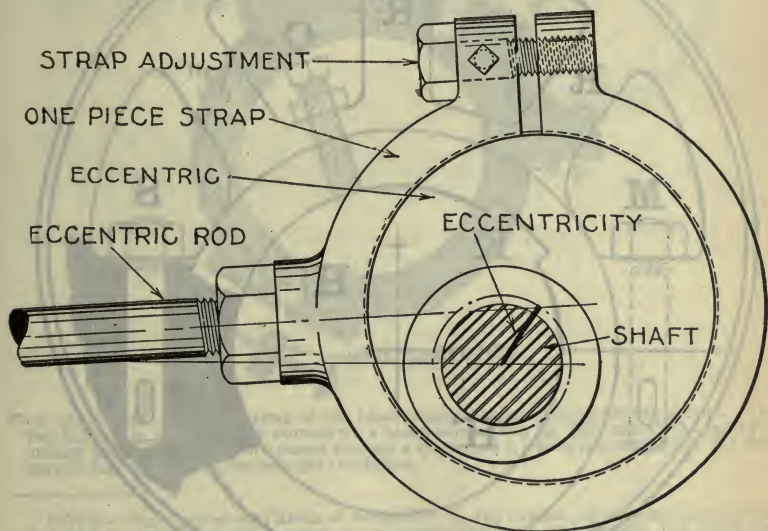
Eccentric strap in one piece. A type of strap for use in inaccessible places, as on small multi-cylinder marine engines having cast frames and valves on the side. On account of the poor fit after adjustment, this type of strap is liable to heat, and should be avoided in design wherever possible.
